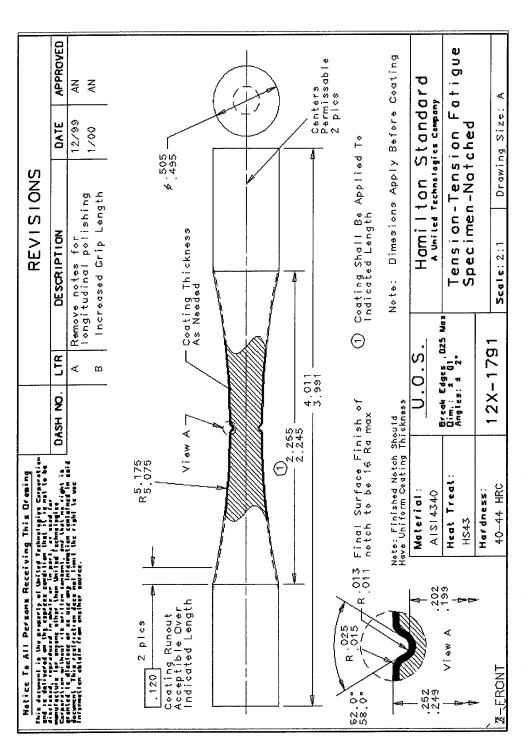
Tension/Tension Fatigue Specimen - Notched
